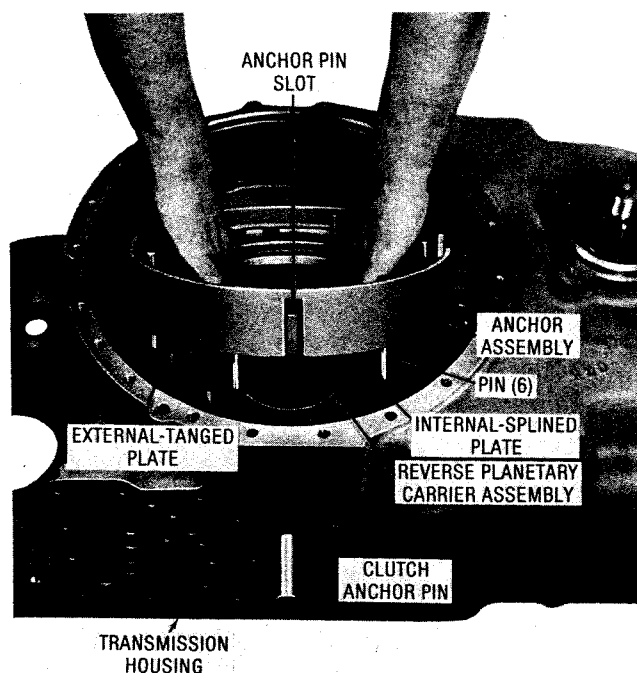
Installing forward-and-reverse clutch anchor assembly
